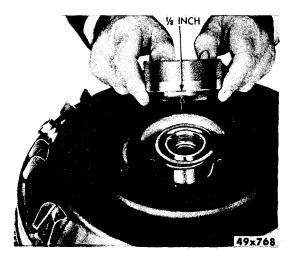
Positioning Inner Sleeve of Tool C-884
